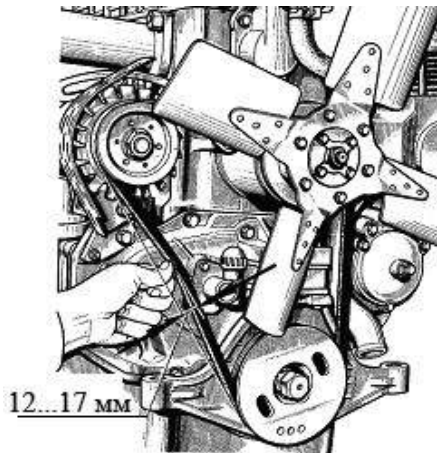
Check tension of engine cooling system fan belt
